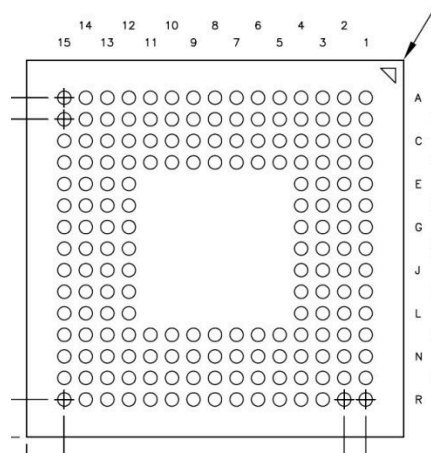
ZVB Package 176-Pin NFBGA Bottom View
